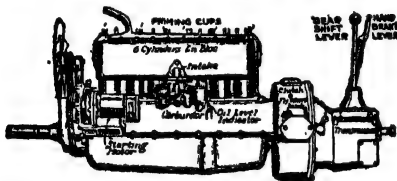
Left side or carburetion side. The inlet pipe between the cylinders to the valve side.
